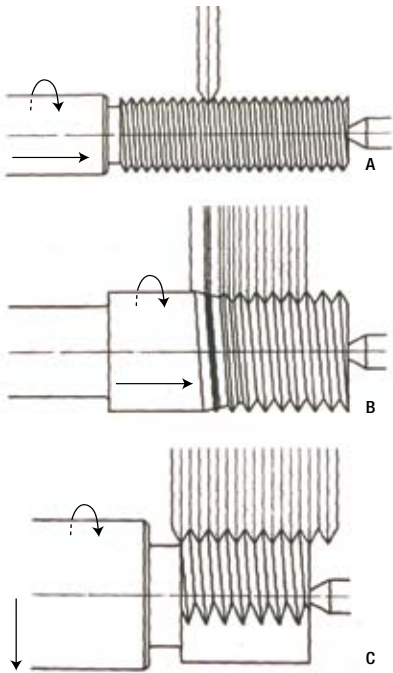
(left): A) Workpiece traversing past a single-rib wheel; B) workpiece traversing past a multirib wheel; C) multirib wheel plunging into the workpiece. Figure 2 (above): A skip-rib wheel produces every other thread on fine-pitch parts.
